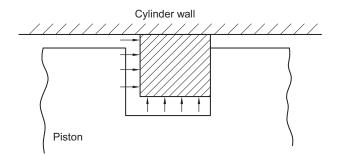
Pressure-induced forces acting on a typical compressor piston ring. Courtesy of American Society of Mechanical Engineers (ASME).
